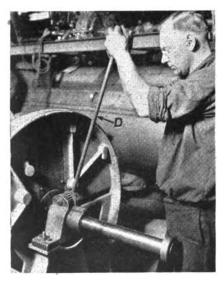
The rack and pinion provide means for feeding the cutter against the surface to be machined.
